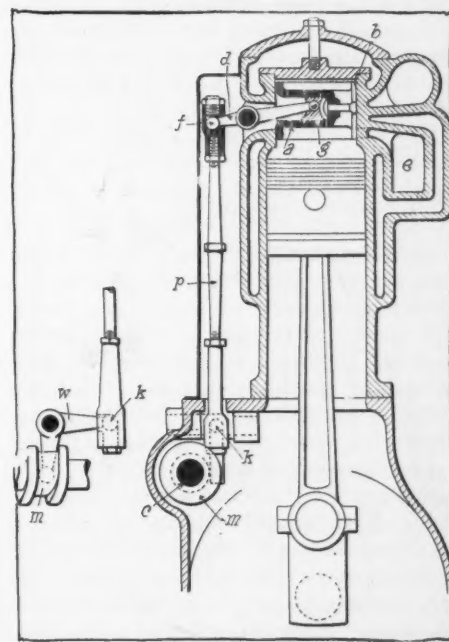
FRENCH MOTOR SAID TO BE SUCCESSFUL
